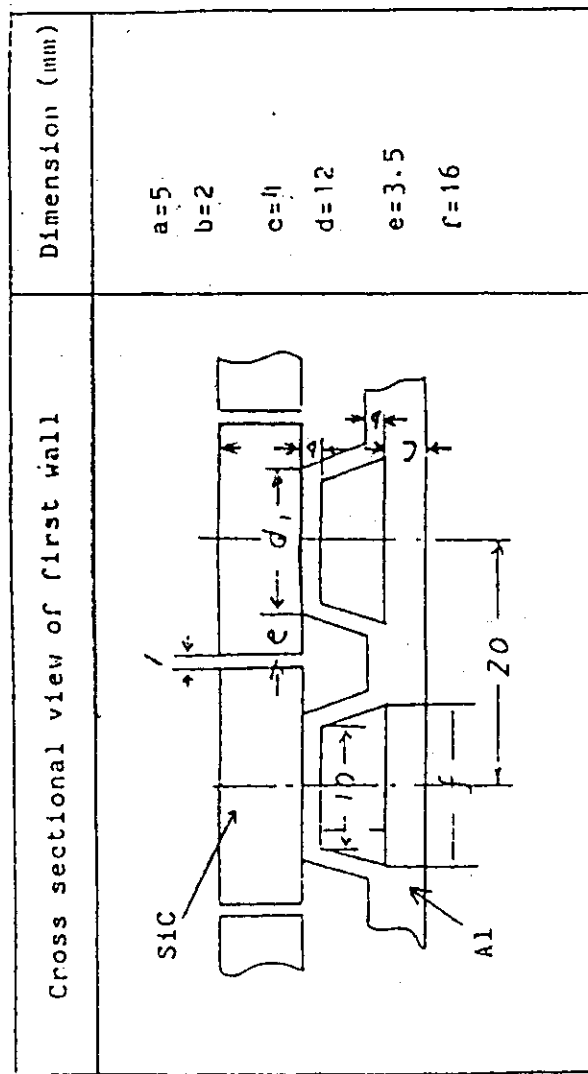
Cross-sectional view of the first wall (blanket B)
